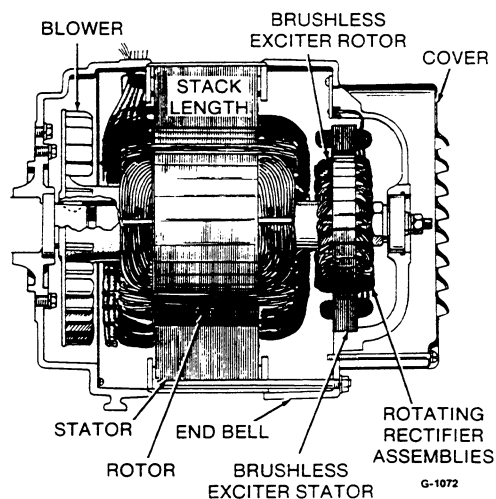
GENERATOR (CUTAWAY VIEW)
